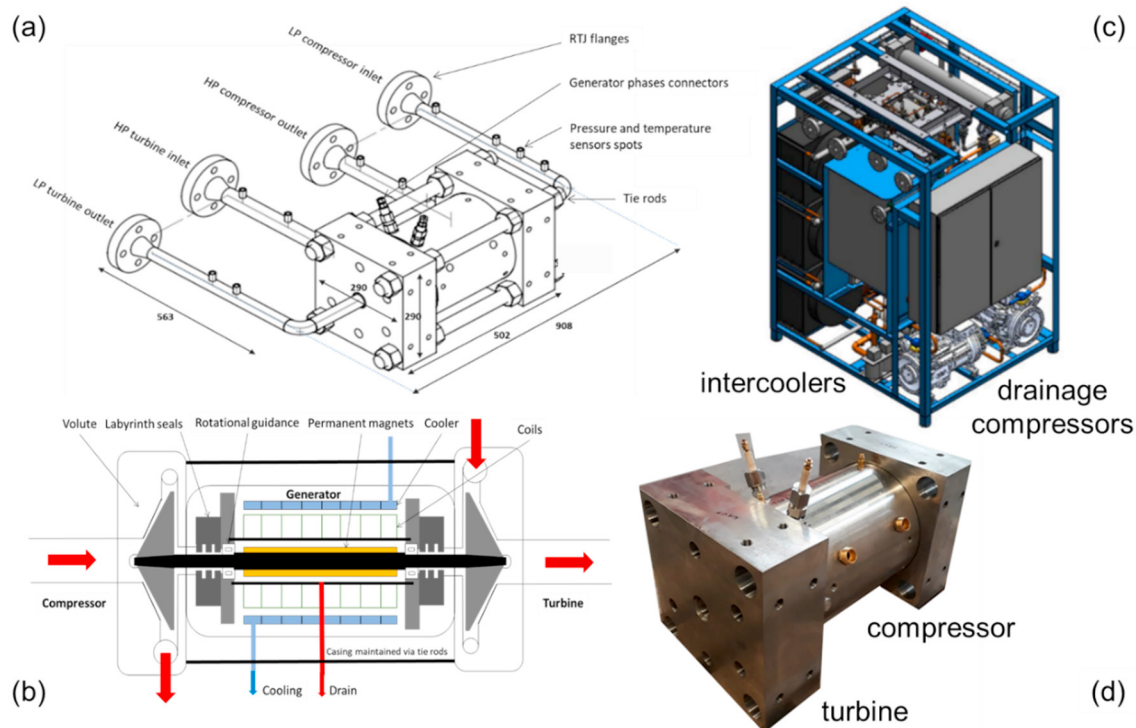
CGT unit: (a) turbomachinery and generator dimensions and interfaces, (b) operating principle, (c) turbomachinery and ancillaries (d) picture of the manufactured and assembled turbomachinery and generator unit
